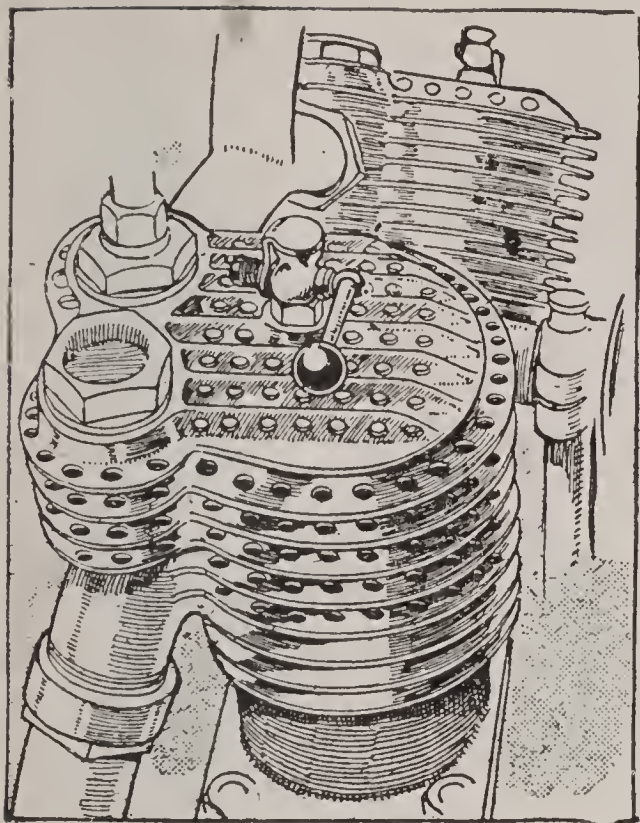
Showing Method of Perforating Flanges to Facilitate Air-Cooling.
